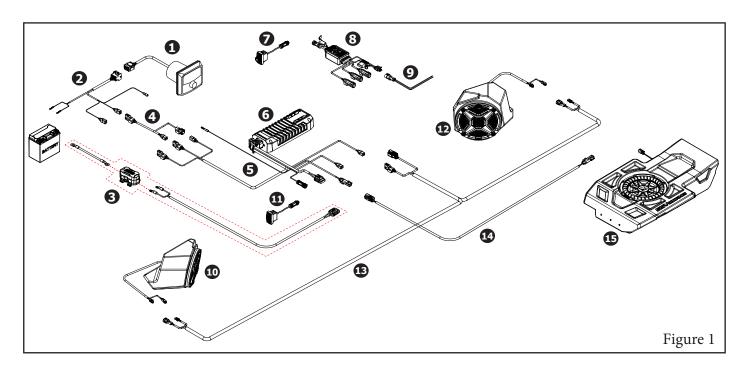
is designed to show the installer a reference overview of the complete 3 speaker RGB LED wiring diagram. Each installation section will have its own detailed wiring diagram.
